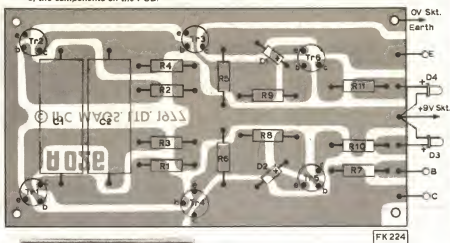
above, is the printed circuit board, copper side, shown full size. Fig. 3: below, is the layout of the components on the PCB.
